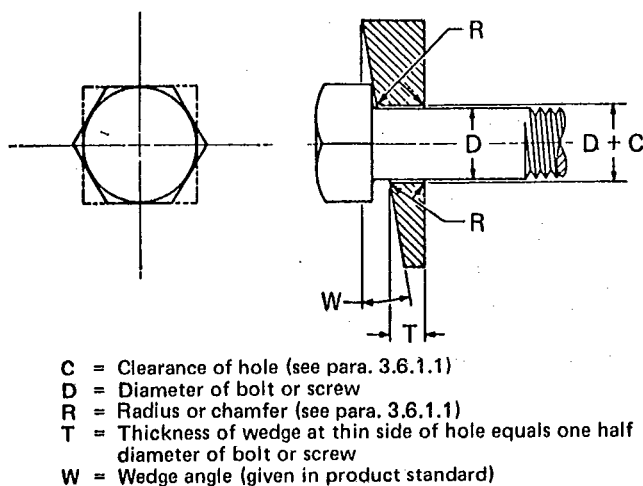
WEDGE TEST DETAILS—BOLTS AND SCREWS
